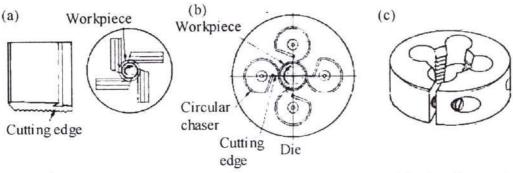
(a) Straight chasers for cutting threads on a lathe. (b) Circular chasers. (c) A solid threading die.
